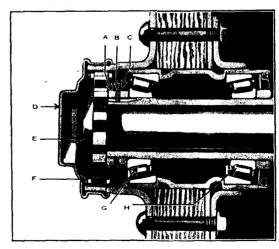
Sectional view of rear wheel hub, showing bearings
